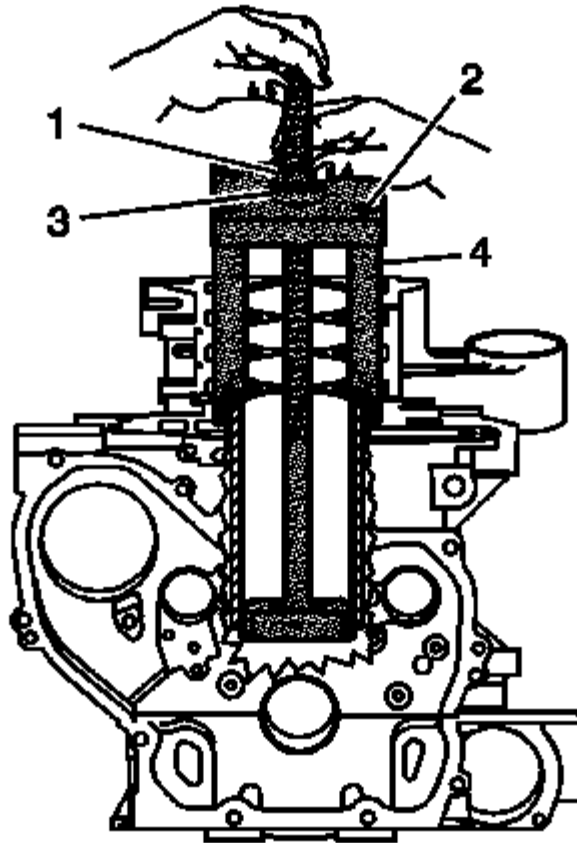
Aligning Cylinder Bore Sleeve Puller
